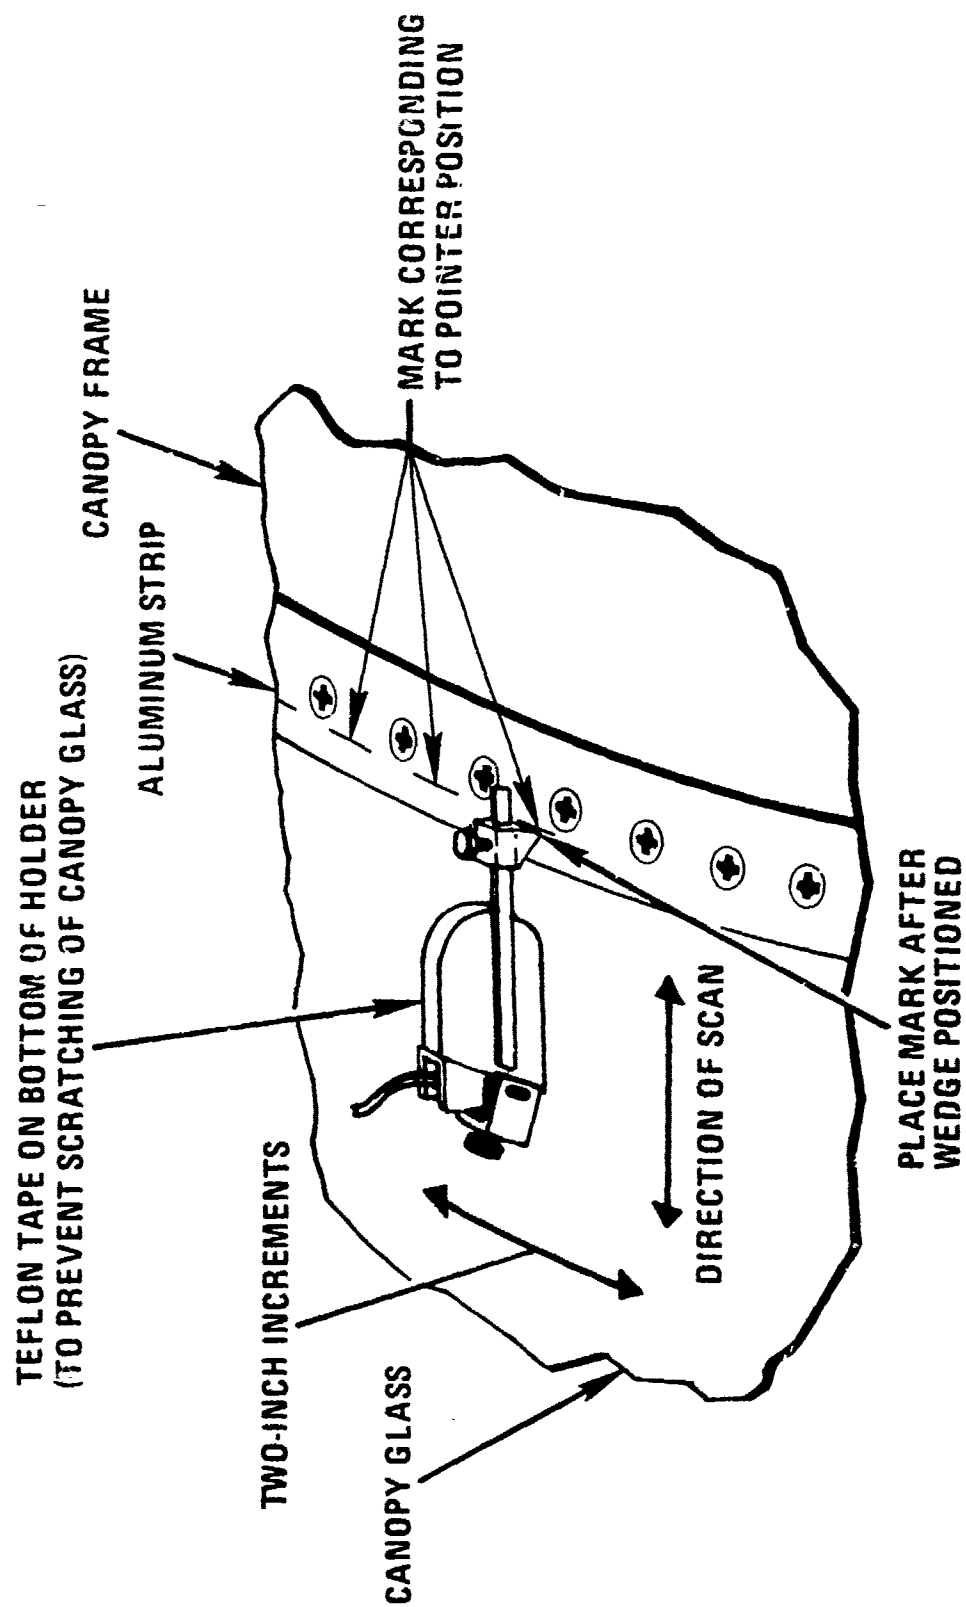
TYPICAL PLACEMENT OF TRANSDUCER HOLDER ON AREA OF INSPECTION - ANGLE BEAM TECHNIQUE
